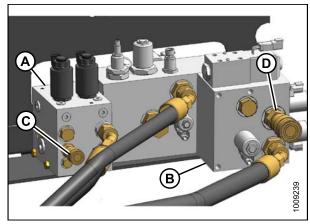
Valve Blocks with Reverser Valve Configured for Auger Header
